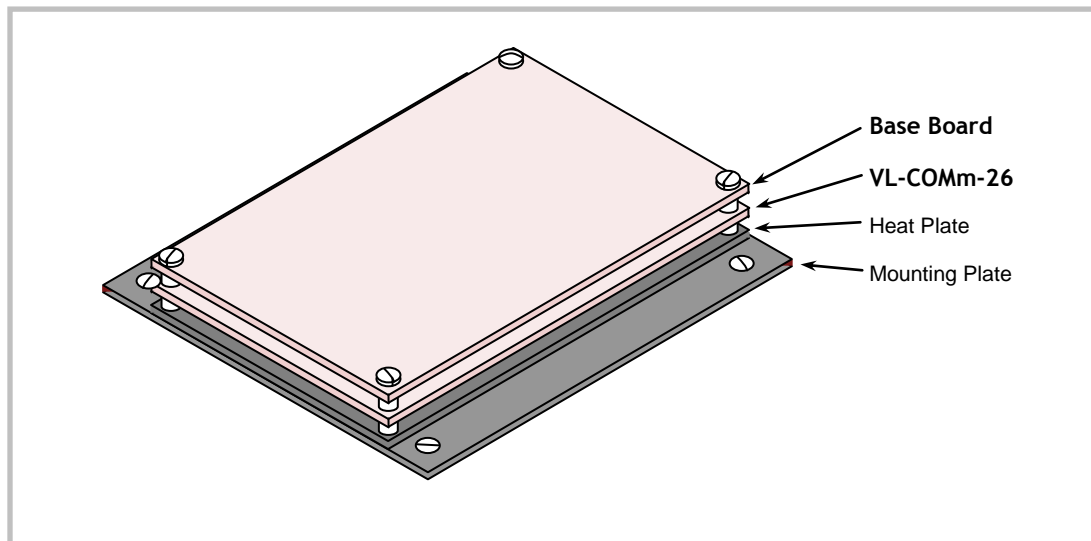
Attaching the VL-COMm-26 to the Base Board
